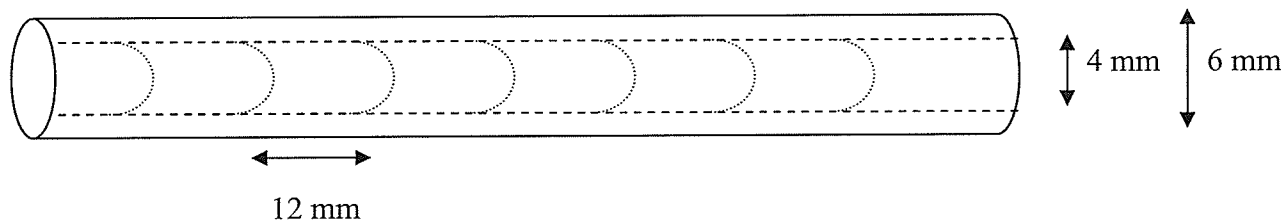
Schematic diagram of electron beam welding specimens (Tack-welded assembly of 6 mm diameter specimens)
